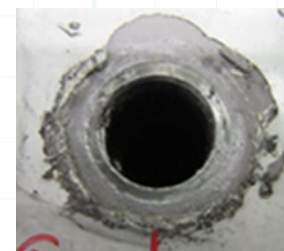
Painted surface after Junker Vibration test with only bolt head. Clear removal of paint, Cracks in the paint can also be seen.
